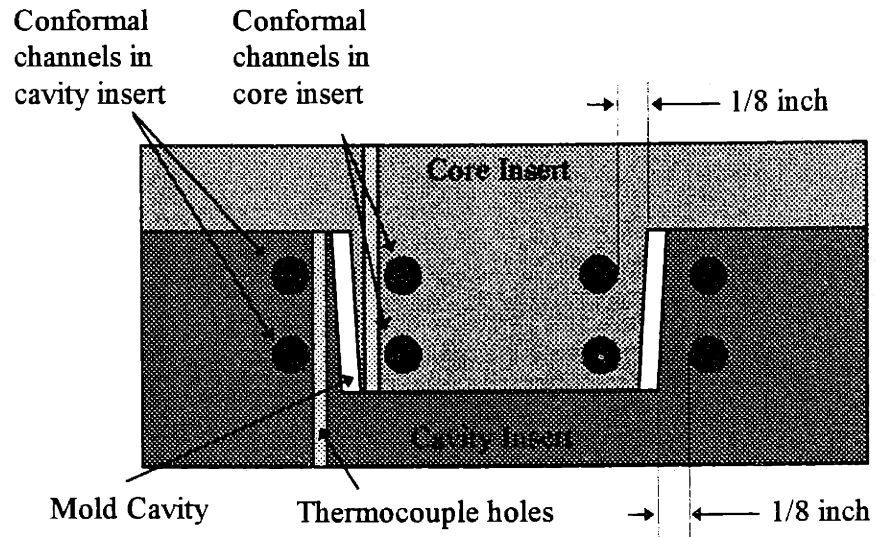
Cross-section of the mating 3D Printed core and cavity inserts.
